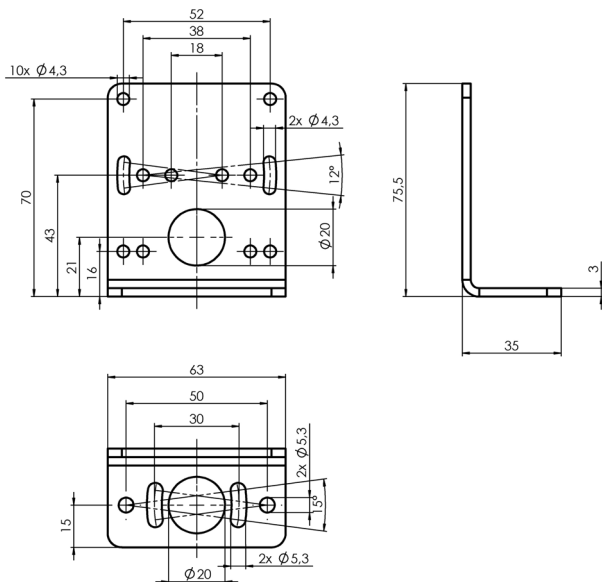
Holder dimensions for all receivers and emitters BLA 32D and BLA 50D
